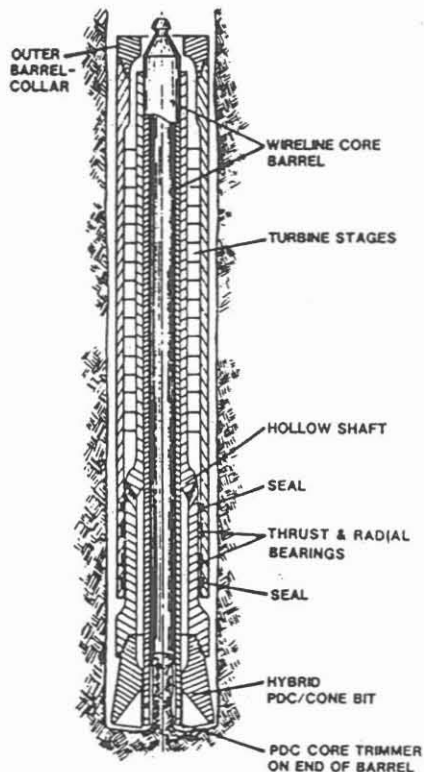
Drilling turbine with hollow rotor and wireline retrievable inner barrel (Ref. 3)
